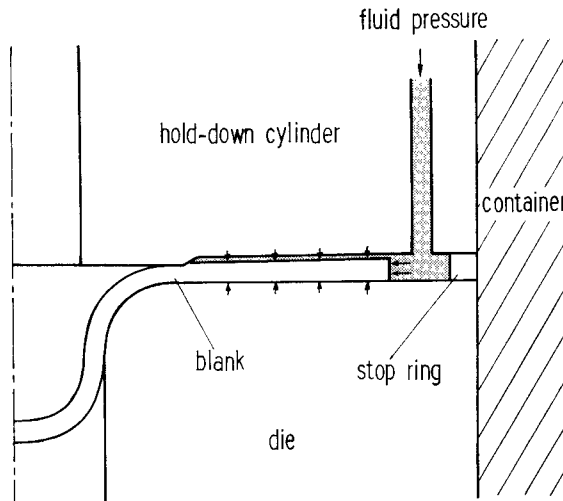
Schematic diagram of main equipment used for punchless drawing utilizing lateral fluid pressure.
